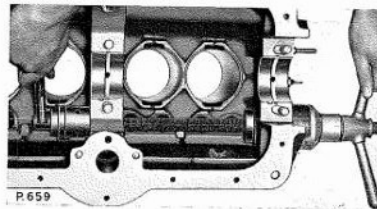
Fitting the new centre camshaft bearing, using the Churchill Tool 32, in conjunction with the adaptor sets R.G.32-3 and R.G.32-4
